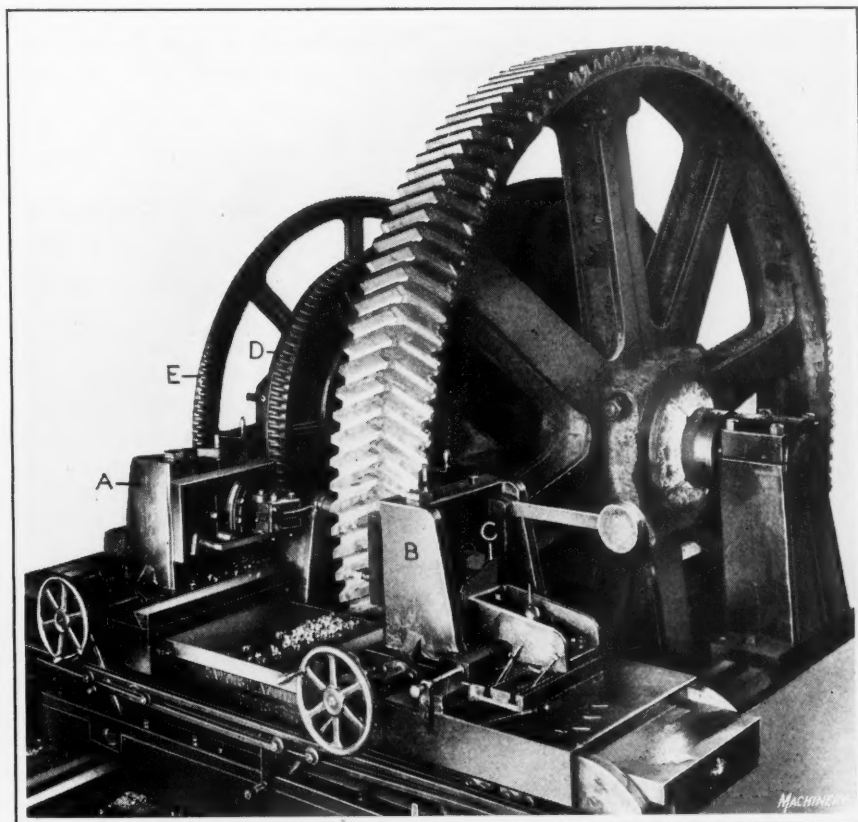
Double-helical Gear Planer for cutting either Herringbone or Spur Gears of Large Pitch
